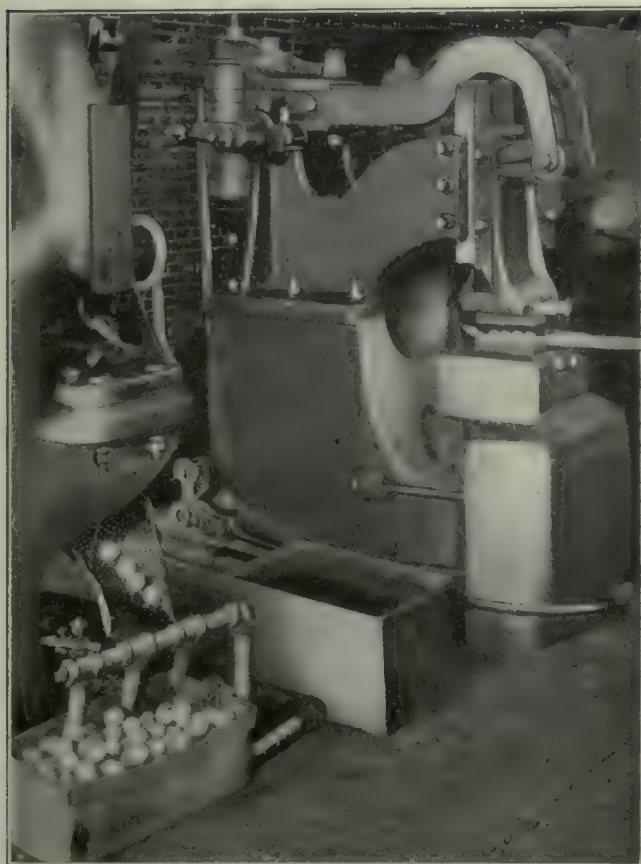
FORGING STEEL BALLS. ALSO SHOWING HOT PRESSED BALLS COMING FROM THE PRESS AND COOLING DEVICE
